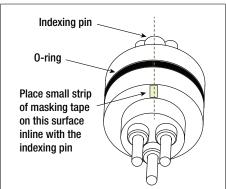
Placing Masking Tape Alignment Marker on Male Connector
